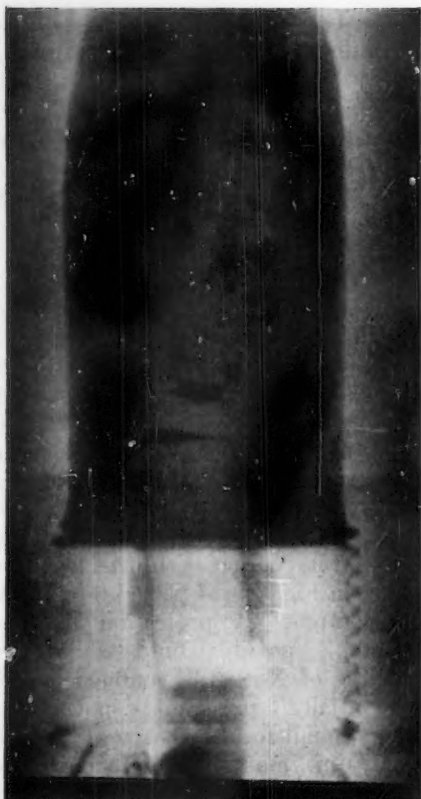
Radiograph of the Explosive Cavity of a 6-in. Armor-Piercing Projectile After Having Been Fired Through 6 in. of Armor Plate.
